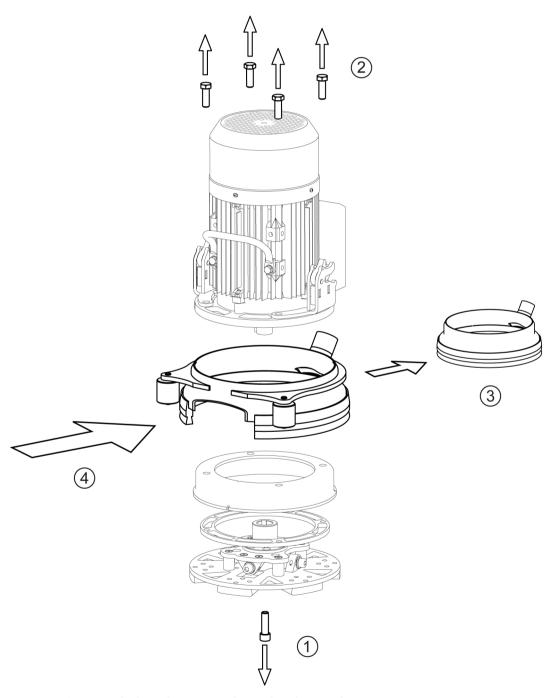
Removal of grinding cover - fitting the edge grinding cover
